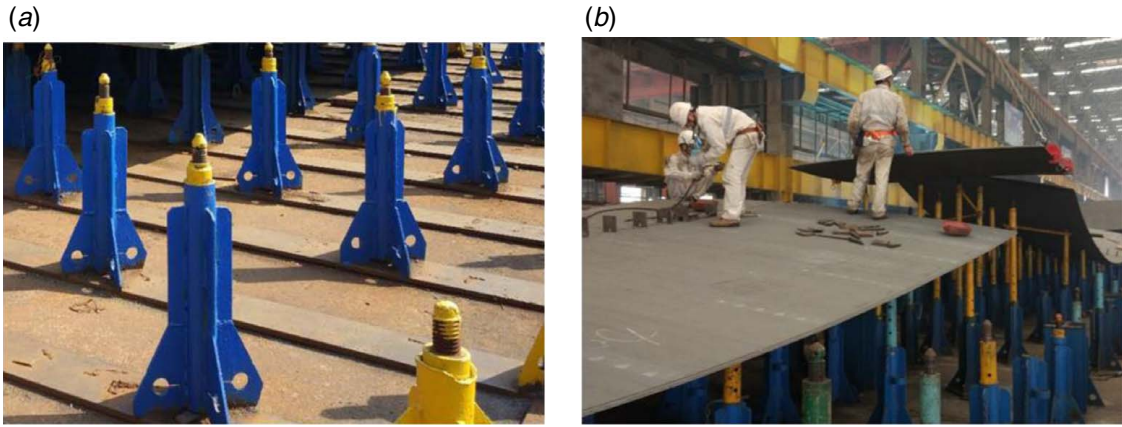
The fixtures and fixture layout in a ship curved panel assembly process: (a) the fixtures used in the ship hull assembly, and (b) the assembly of curved panels
